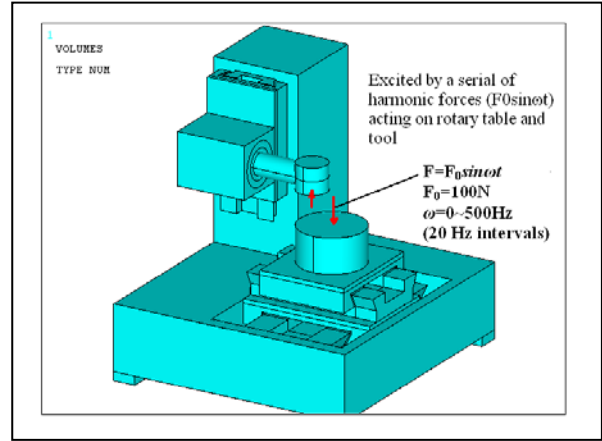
5-axis micromilling machine (Ultra-Mill)
